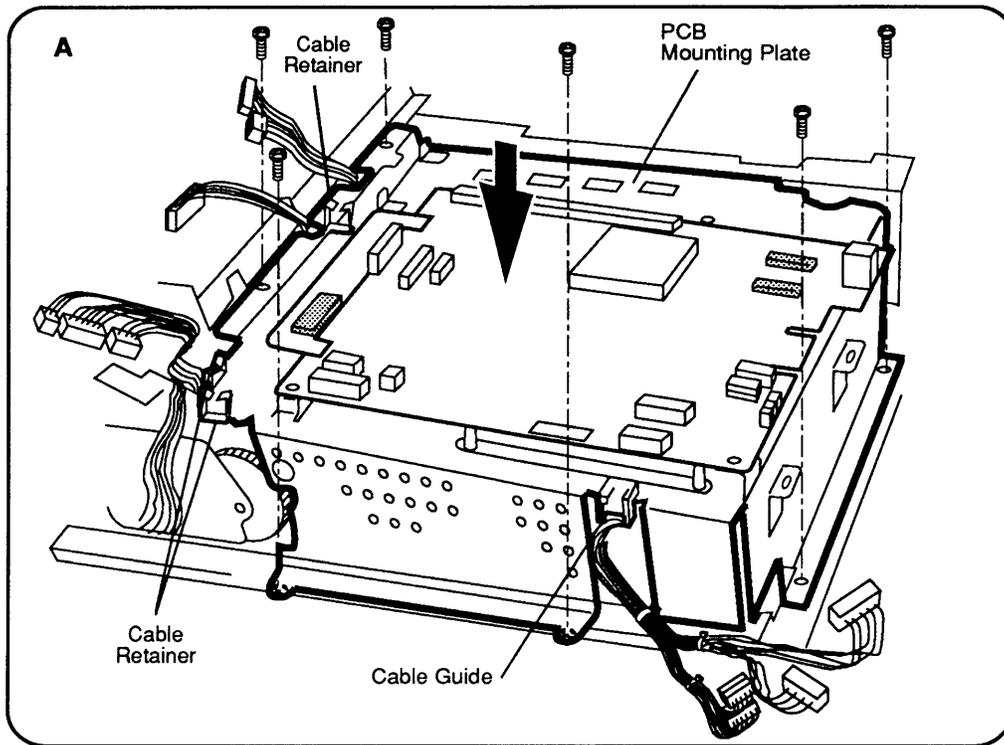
PCB Mounting Plate (LaserWriter LS/L)
